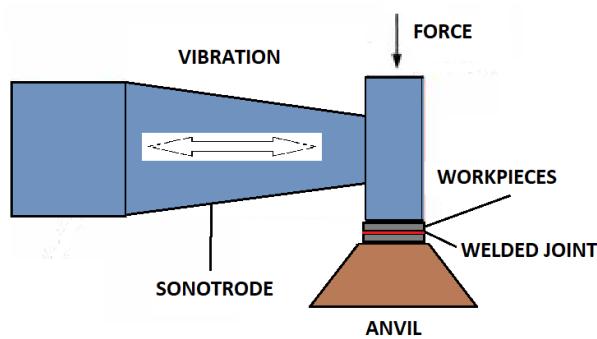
The setup of the equipment used for ultrasonic welding
